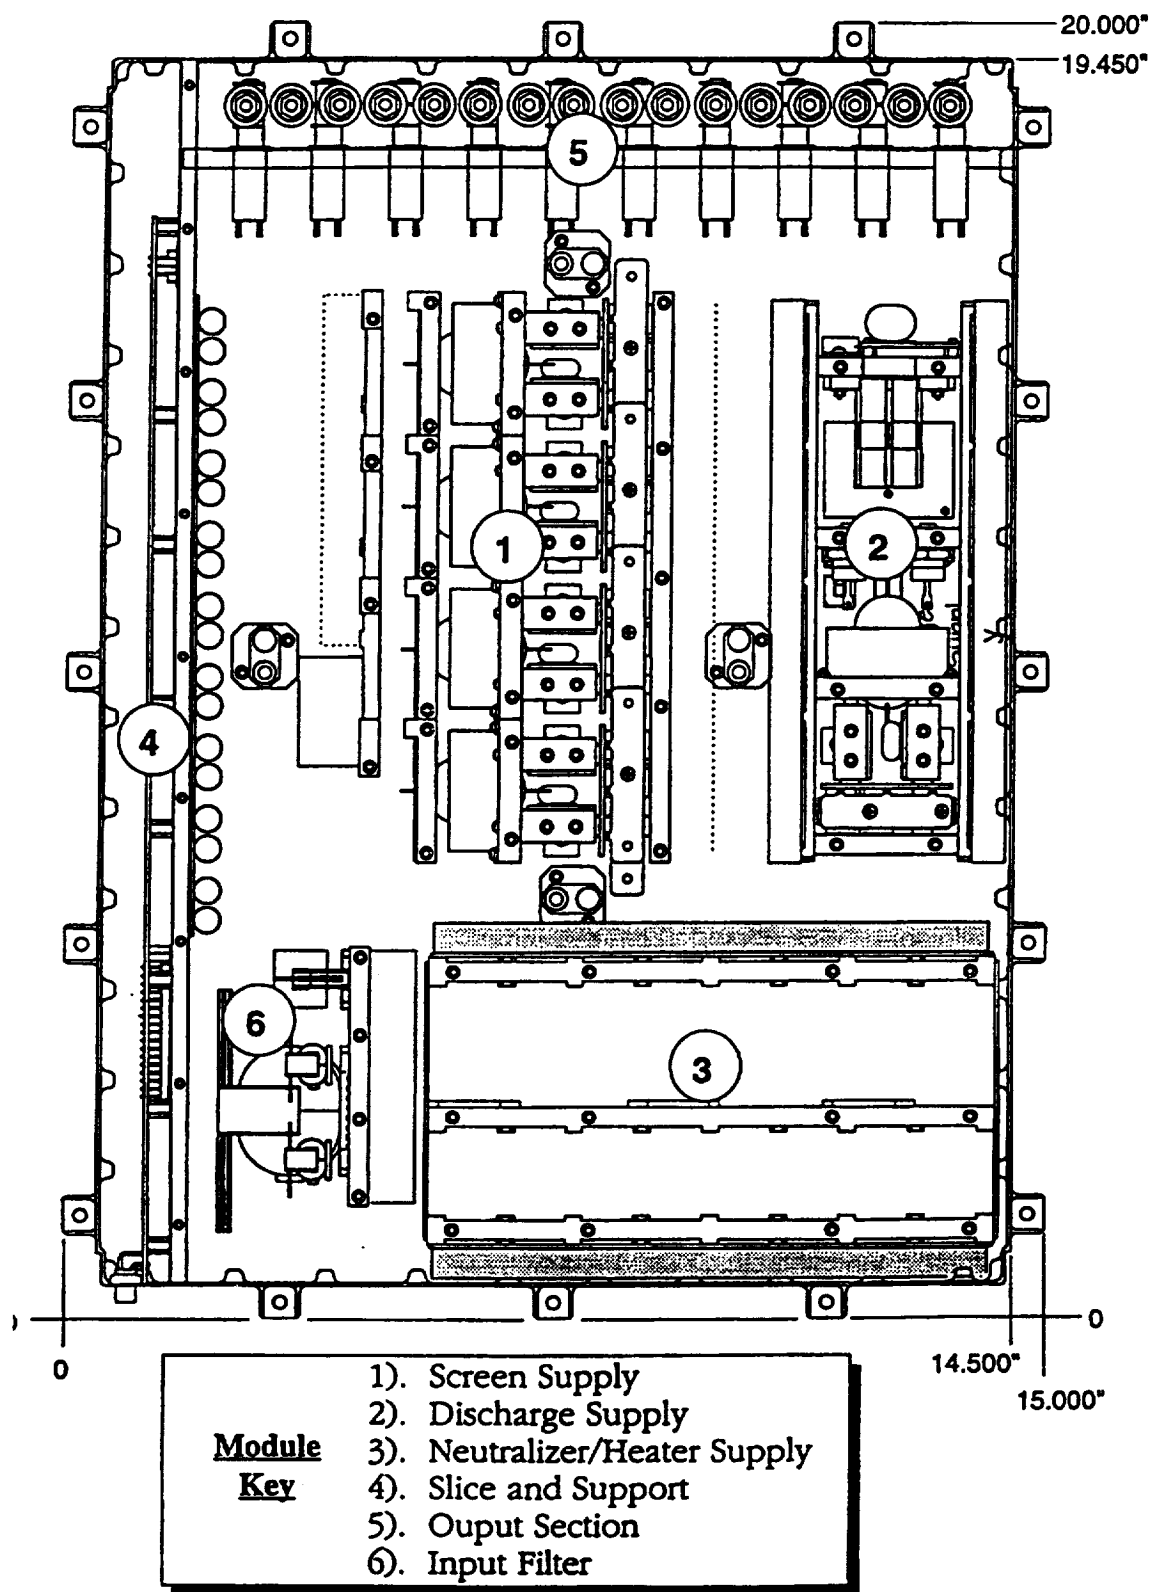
NSTAR PPU Electronic Subassemblies - Top View (Cover Removed)
